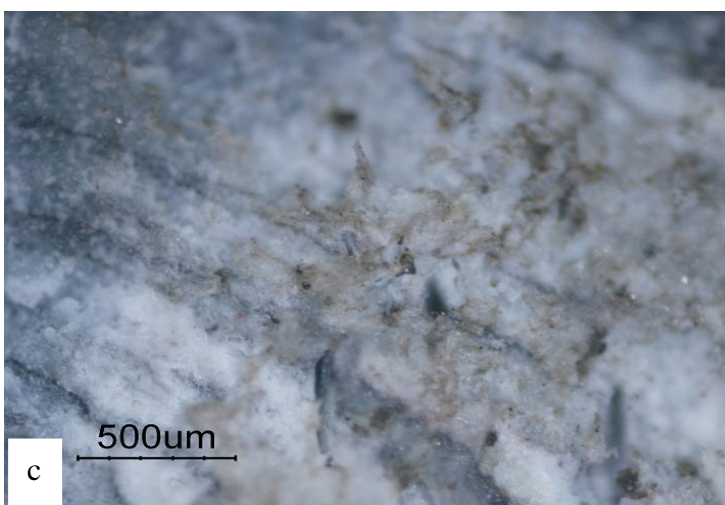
Fracture surfaces observations for the tensile test samples (magnification 50x) .
